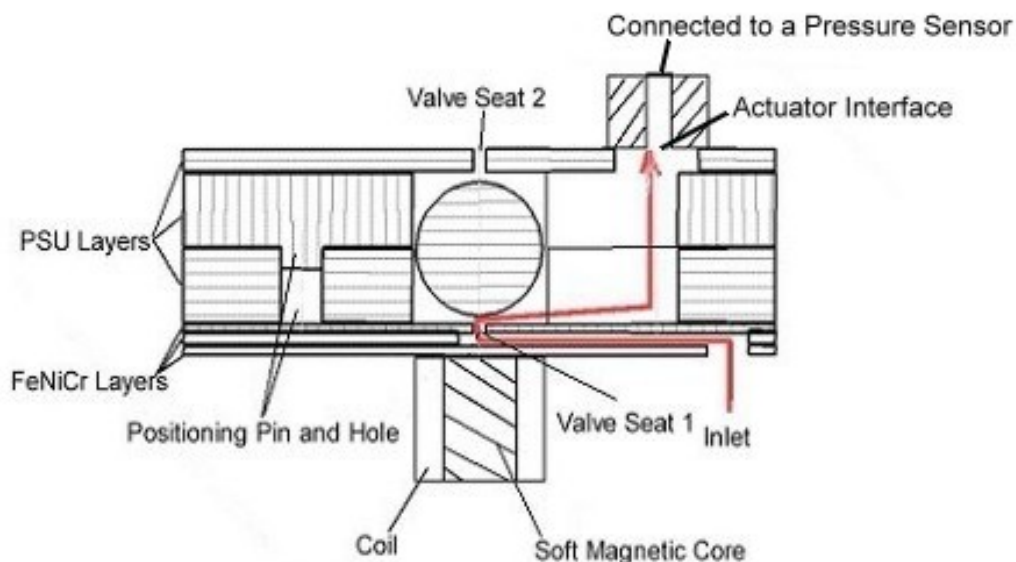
Mechanisms of the valve. The gas flows from the inlet through the three-dimensional flow channel formed by FeNiCr layers to the ball chamber. The ball has 350 μm stroke. It can be pulled and controlled by the coil. Outlet is connected to a pressure sensor to obtain the pressure signal.
